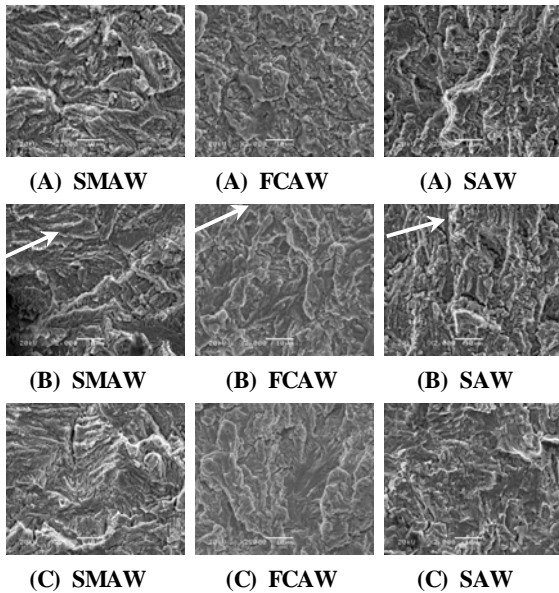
Fractography of fatigue crack growth surface at FCAW, SMAW, SAW
